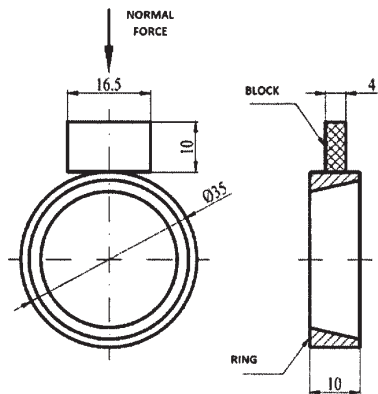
Shape and dimensions of linear contact friction couple (Timken type)
